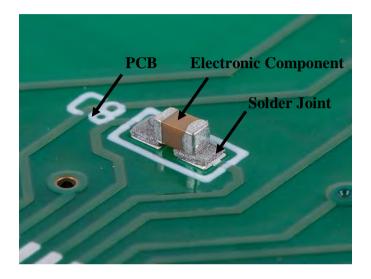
Reflow soldering product with electronic component soldered on PCB.
